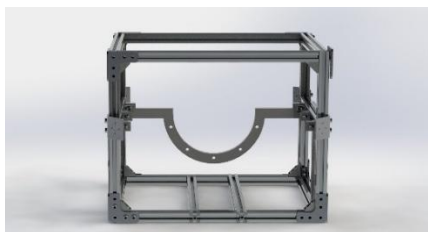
aluminium extrusion structure designed by Mohaned Rafea using SolidWorks
